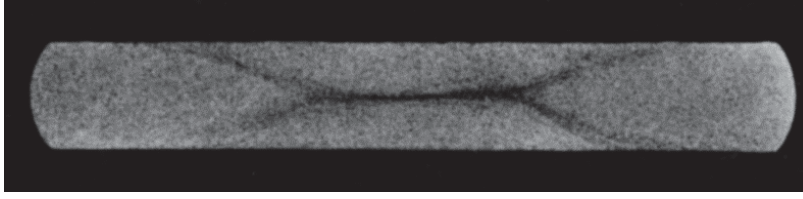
An example of shear bands in a sidepressing forging[11].
